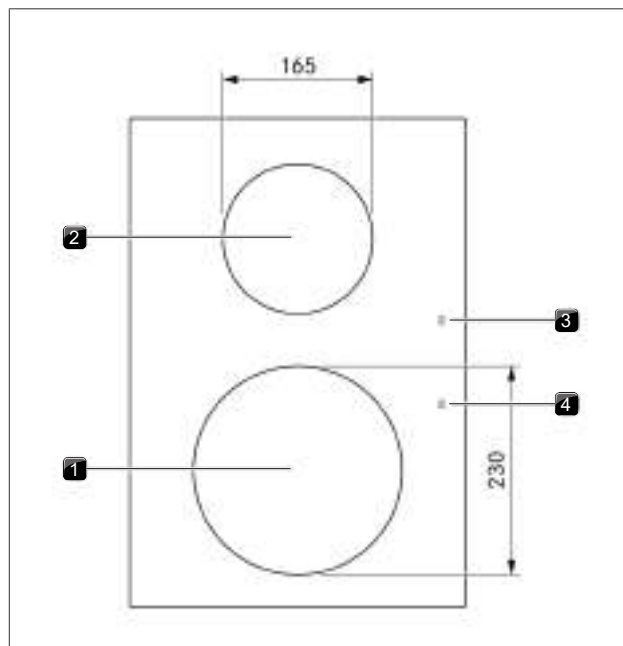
Layout of cooktop PKI3 and cooking zone dimensions
